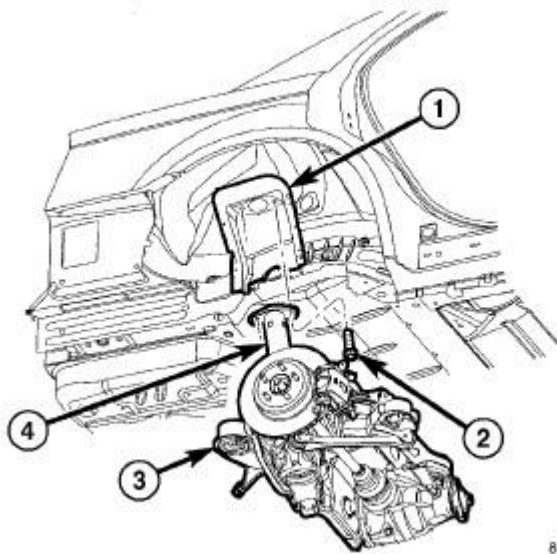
Lower Mounting Bolt, Nut & Shock Absorber
